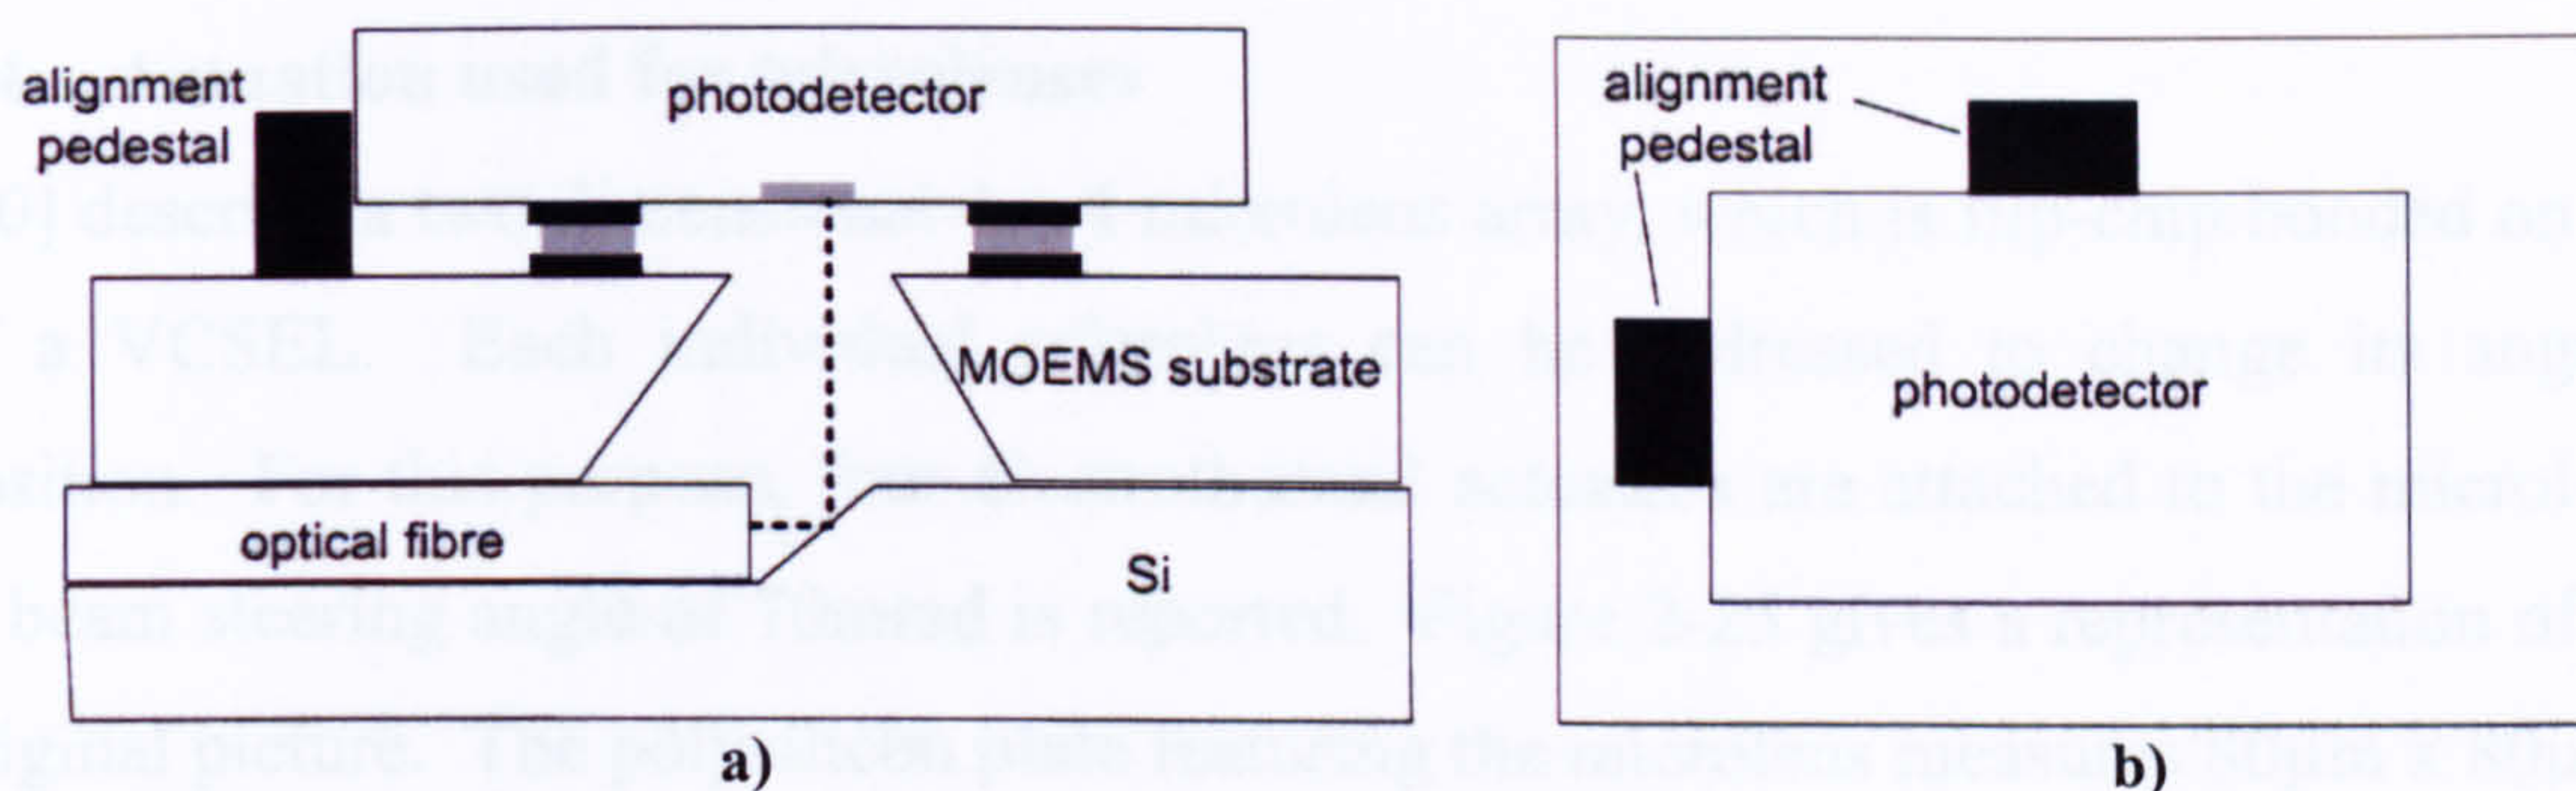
a) Side view of an assembly of a photodetector on top of an optical device. The lateral alignment is achieved with accurately manufactured alignment pedestals. b) Top view of the assembly. Two alignment pedestals are needed to determine the lateral alignment. [38].
